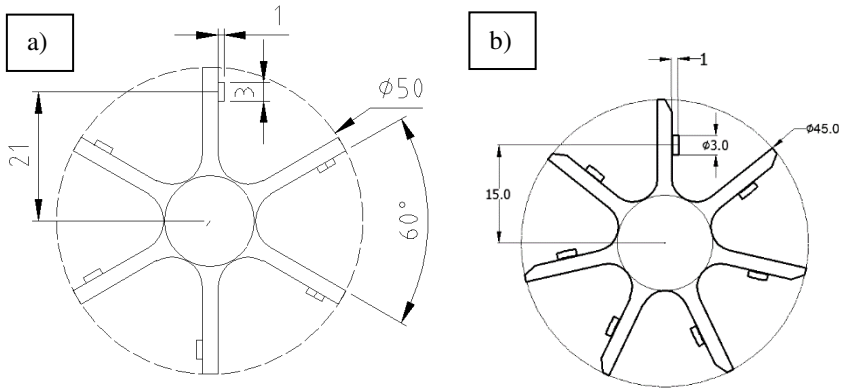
Geometry of: a) single-jet impeller, b) multi-jet impeller
